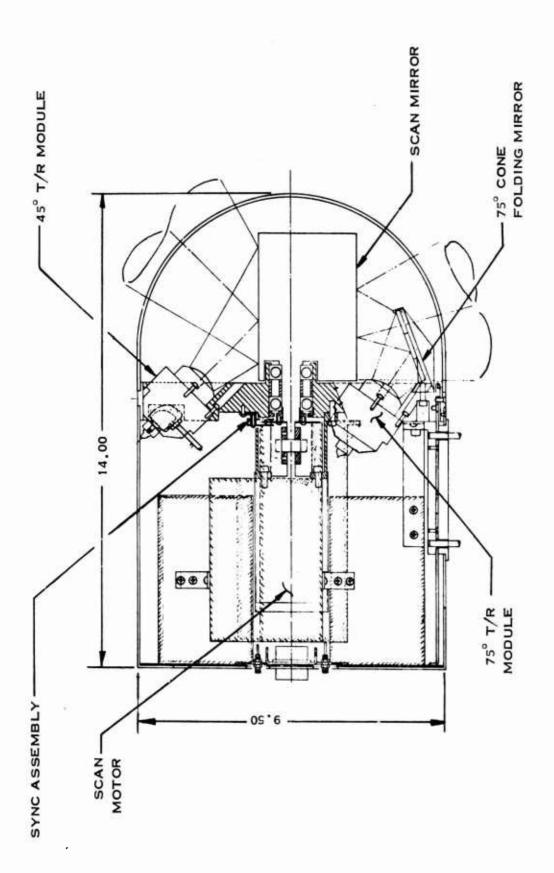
Hemisphere Sensor Bulkhead Scan Assembly
